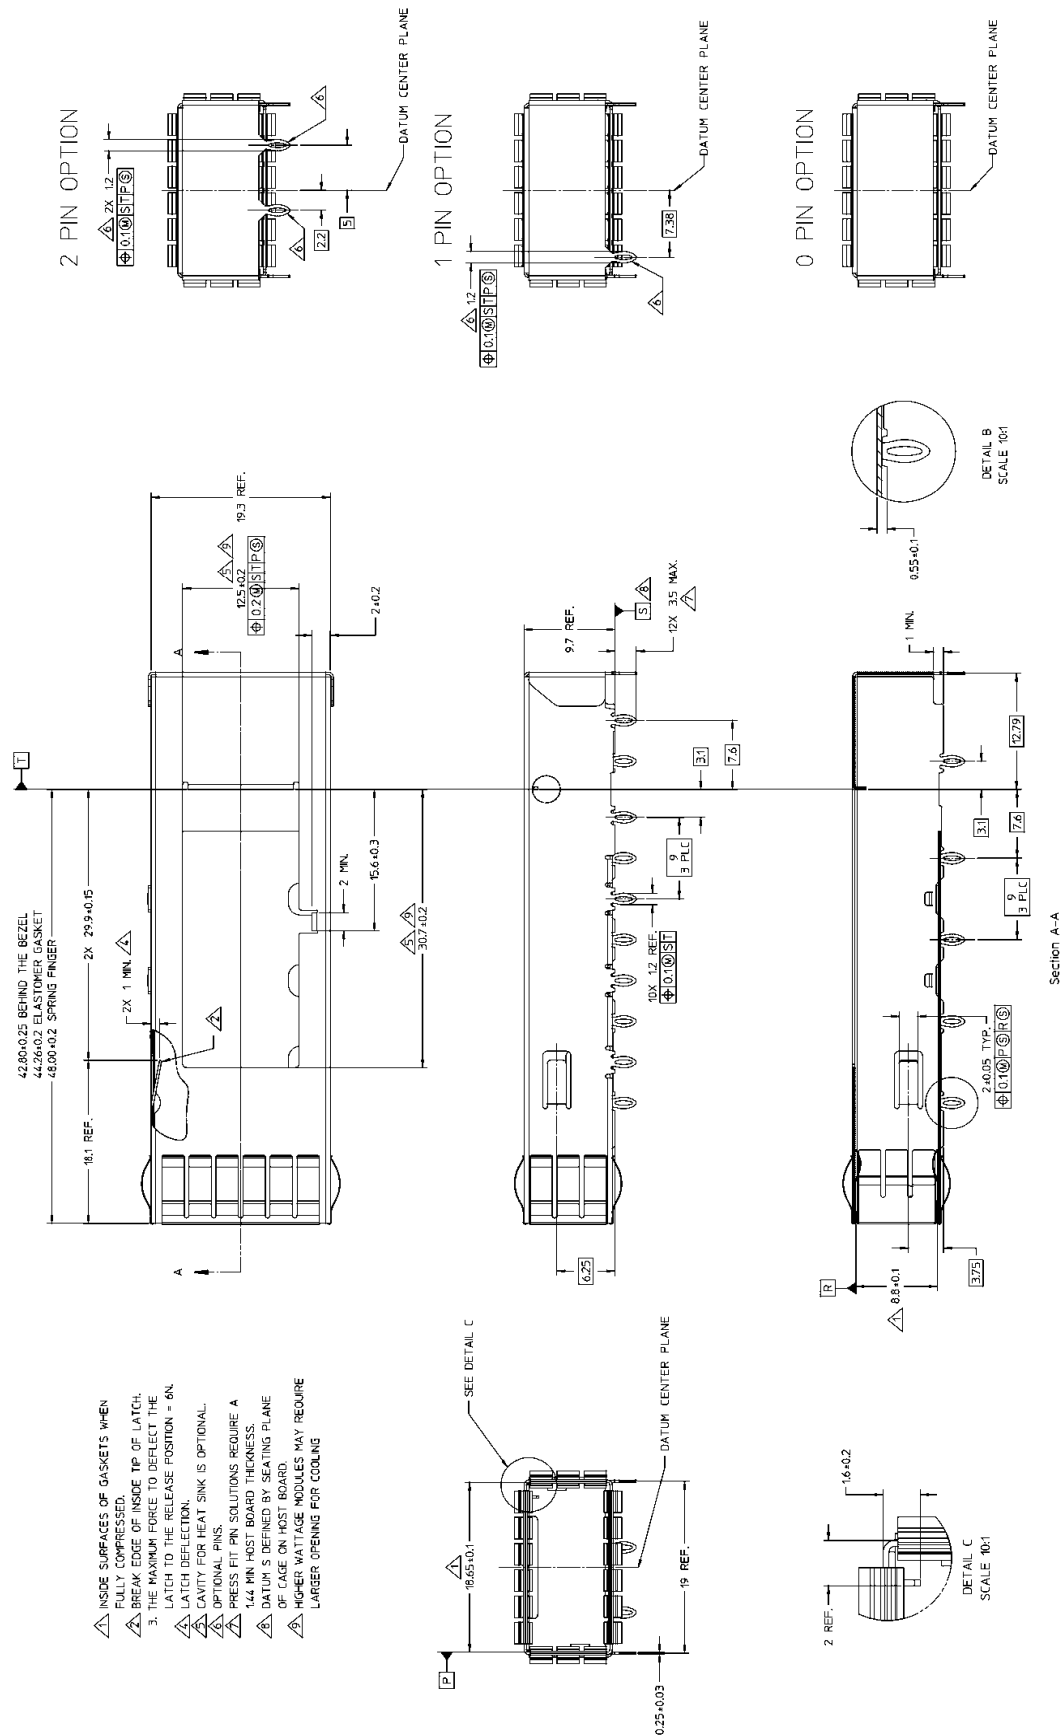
PLUGGABLE MODULE CAGE DIMENSIONS (1 OF 2)
